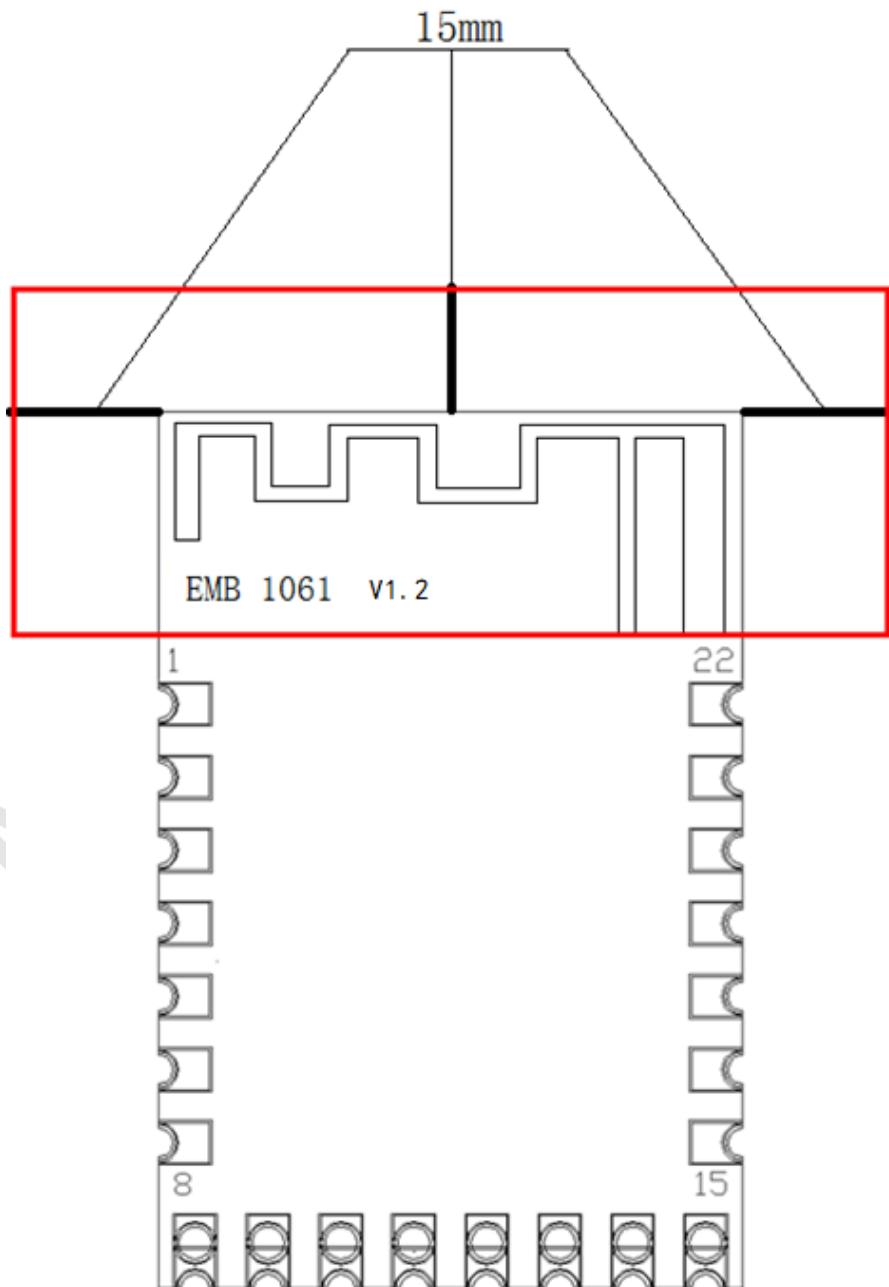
Minimum Clearance Zone of PCB Antenna (Unit: mm)
